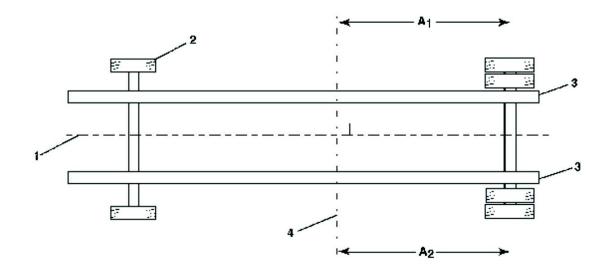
4 x 2 Chassis — A1 = A2 with a Tolerance of No More Than 1/8 Inch (3.3 MM)
